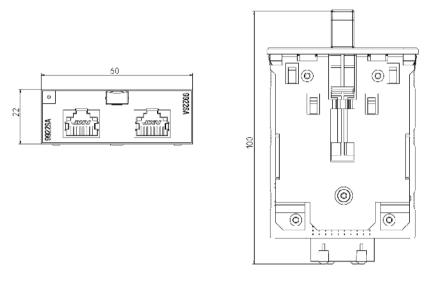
MM900 dimension drawing 2: Electrical RJ-45 ports without securing collar
